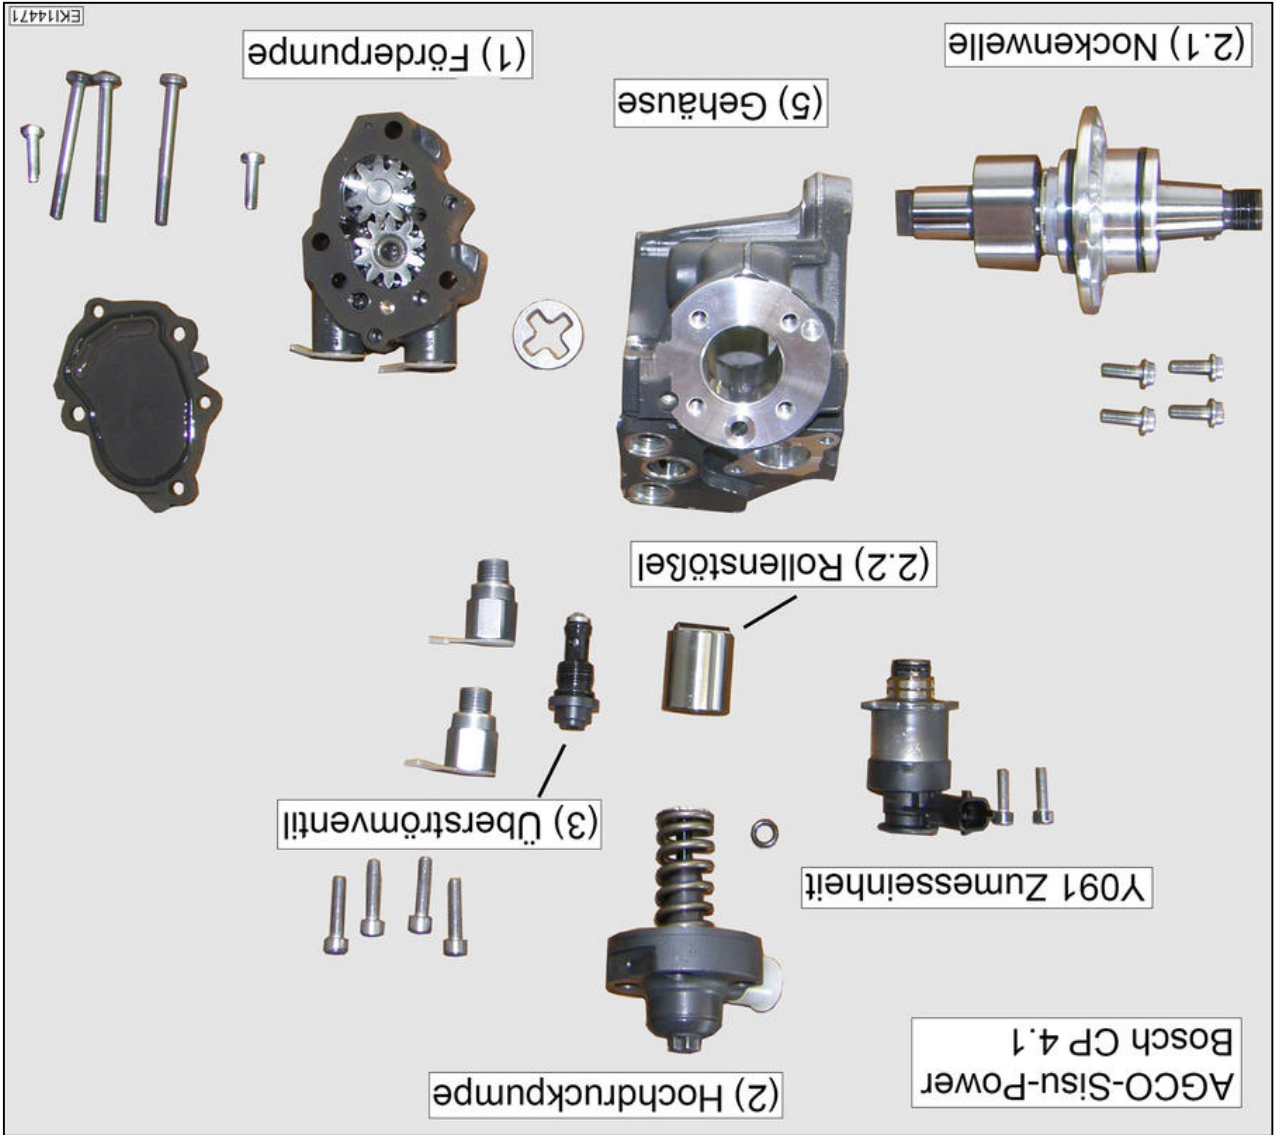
Diesel high-pressure pump (Bosch CP 4.1)
